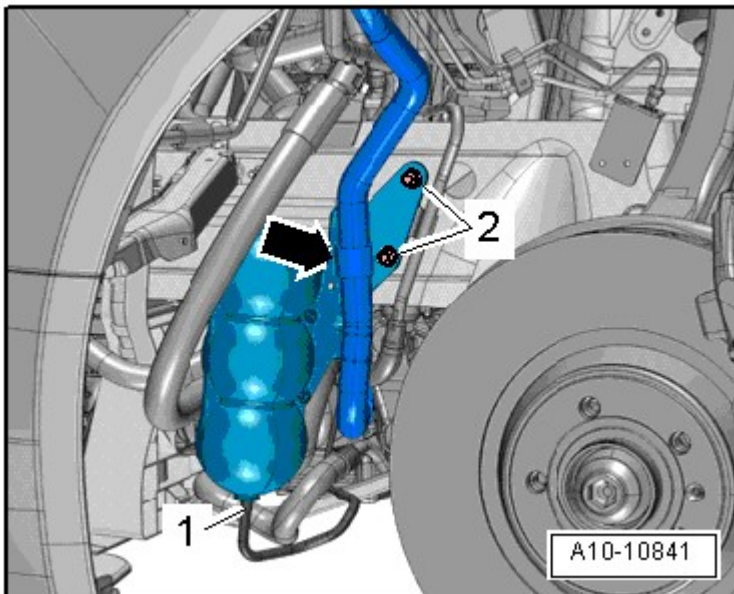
Disconnecting Vacuum Hose And Lay Hydraulic Oil Hose To Side
